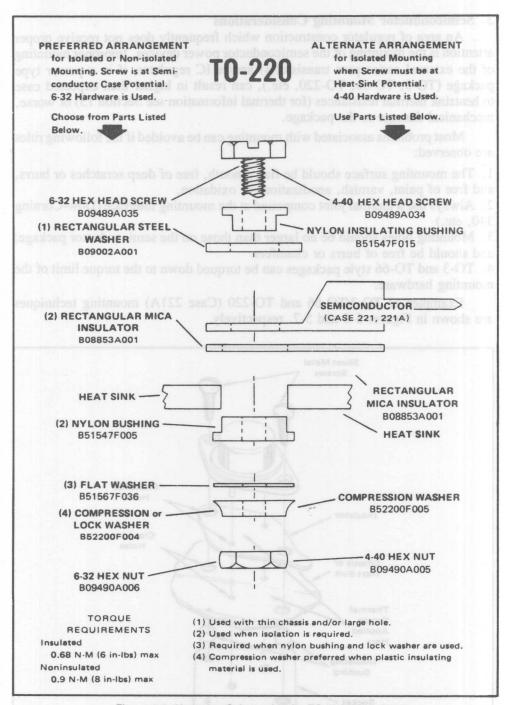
Mounting Scheme for the TO-220 (Case 221A)
